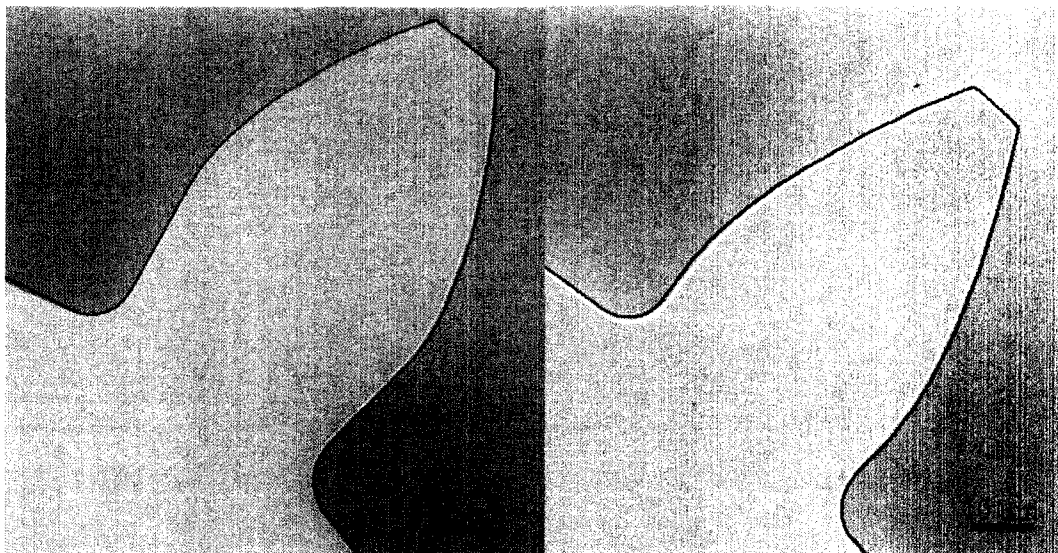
Comparison of spur gear tooth involute profile for a 12-tooth spur gear (left) and 24-tooth spur gear (right).
